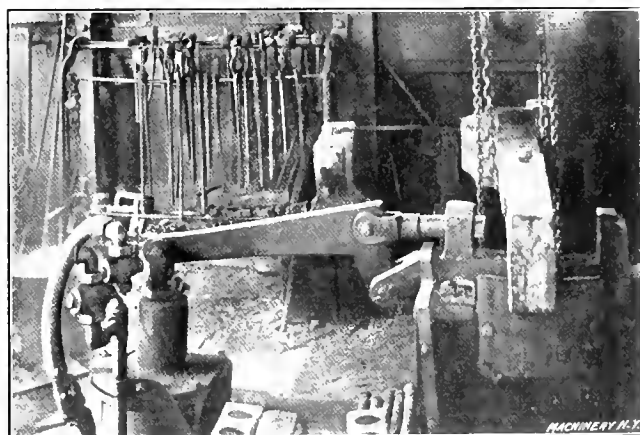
Pneumatic Device for Setting the Rivets at One Stroke
